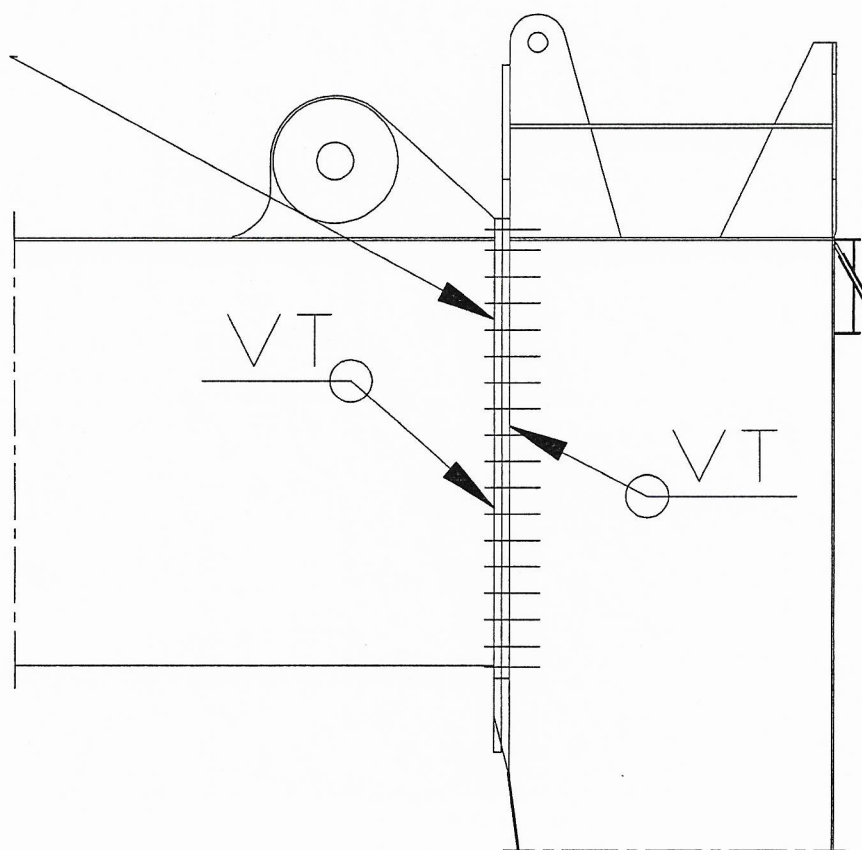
Joints of Front shoulder beam, Leg, Diagonal and Support Beam
